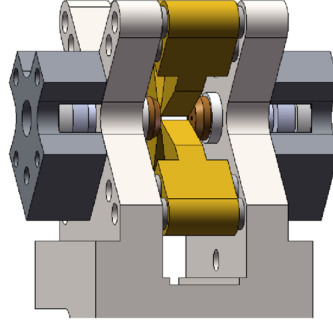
Mirror mounting. The collets are fixed in place by locating the collet mounts with respect to the trap mount structure. The precise locating procedure is detailed in section 3.2.4. SolidWorks design by Matthias Keller.
